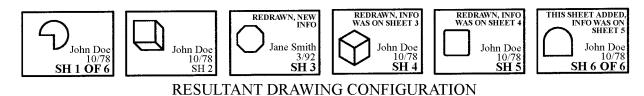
Insertion of a New Sheet With the Drawing Renumbered
